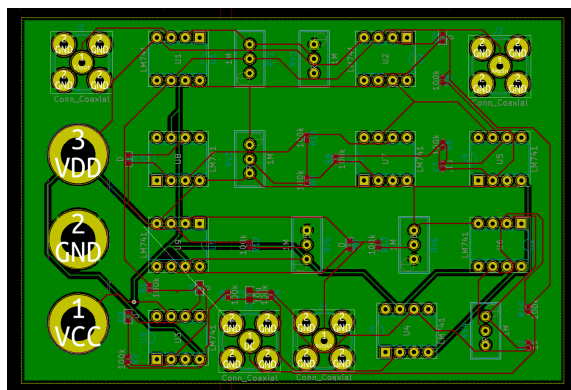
PCB layout of the designed circuit, made in KiCad. The PCB is $6.502\text{ cm} \times 9.652\text{ cm}$, or $2.56\text{ in} \times 3.80\text{ in}$.
